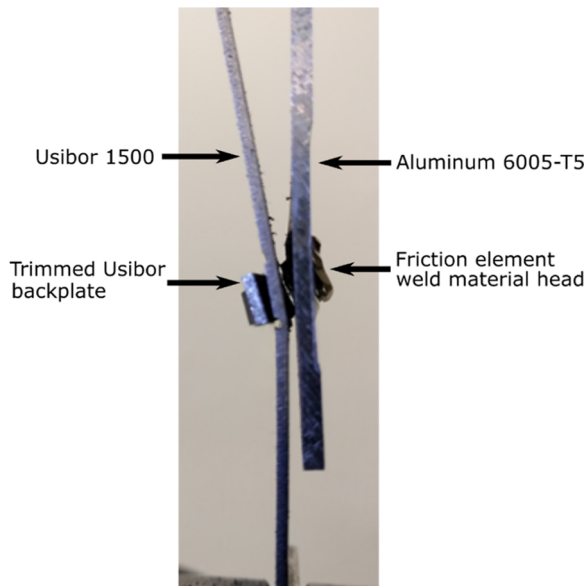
Partial thickness failure with button pull failure in the Aluminum/Usibor friction element weld in the multi-stack joint.
